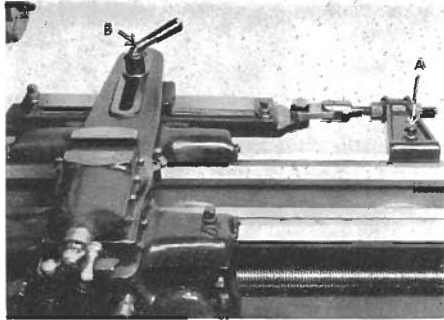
Taper Turning Attachment shown with Cross Feed Screw removed
